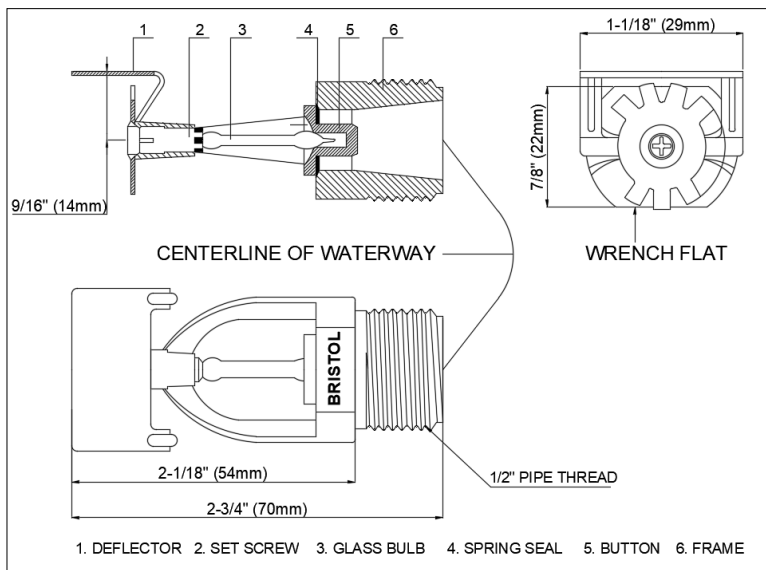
FIGURE A: MODEL BF007 / BF008 HORIZONTAL SIDEWALL SPRINKLERS
